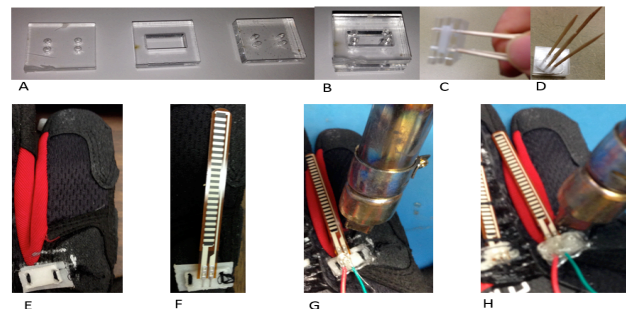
Steps involved in making a sewable sensor holder. A-D: Three layer acrylic mold created with CNC laser cutter used to mold a button with InstaMorph™. E: Molded button sewn onto glove. F: Flexion sensor lined up with finger. G,H: Hot air gun used to immobilize sensor after contacts have been soldered.
